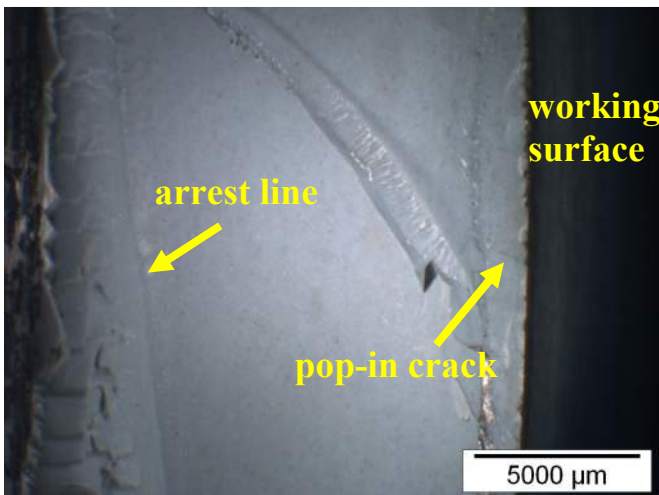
Part of the fracture surface of fragment 1 with the mirror in the stereo microscope.
